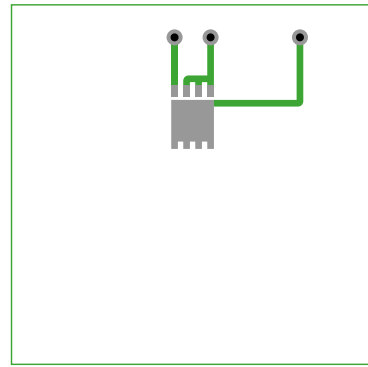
PCB layout for thermal resistance junction to ambient minimum footprint; FR4 board; 2oz copper
